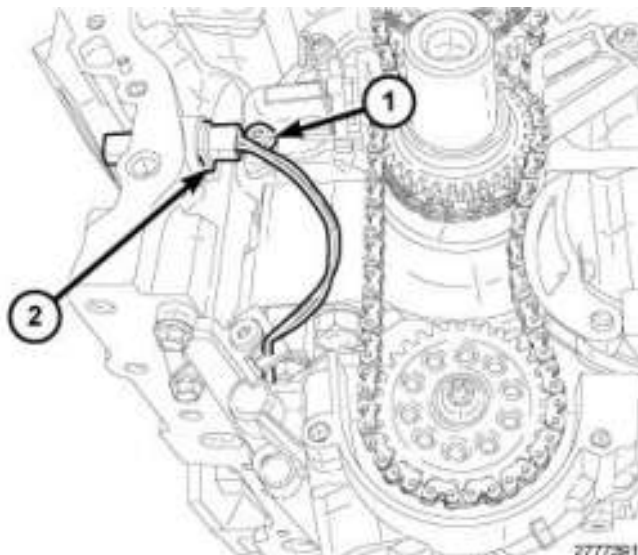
Oil Pump Solenoid Electrical Connector & Primary Chain Tensioner Mounting Bolt
